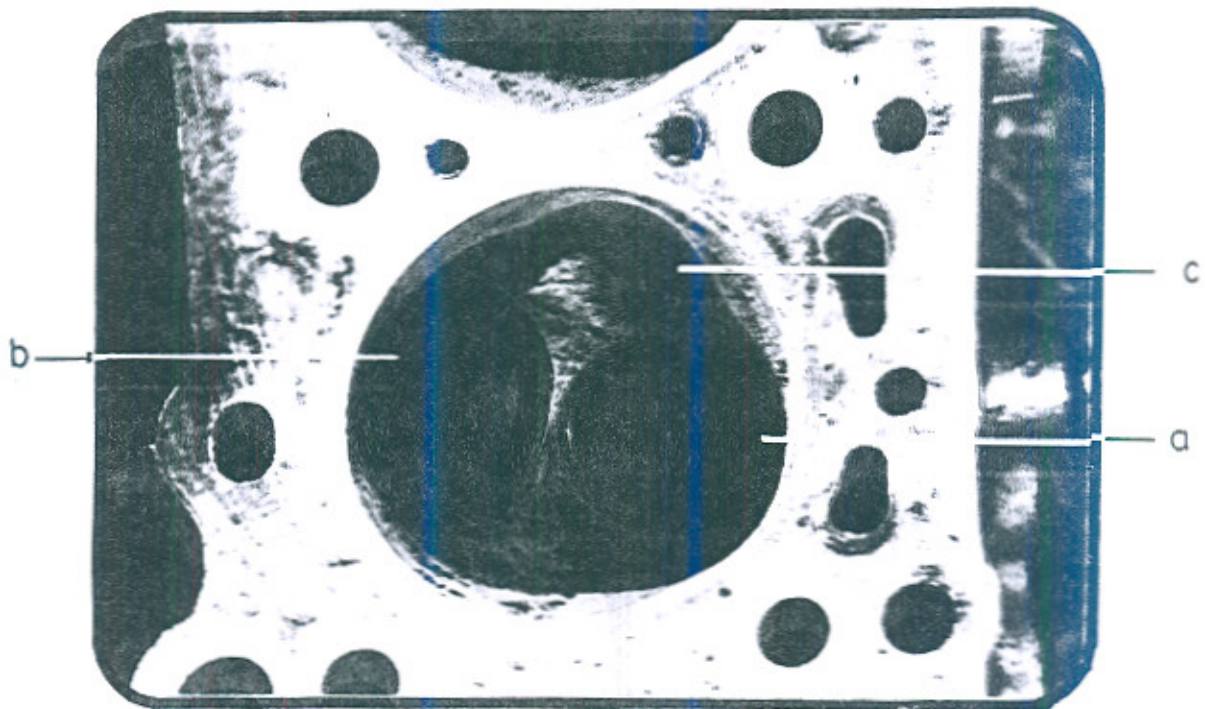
COMBUSTION CHAMBER CYLINDER No.2
